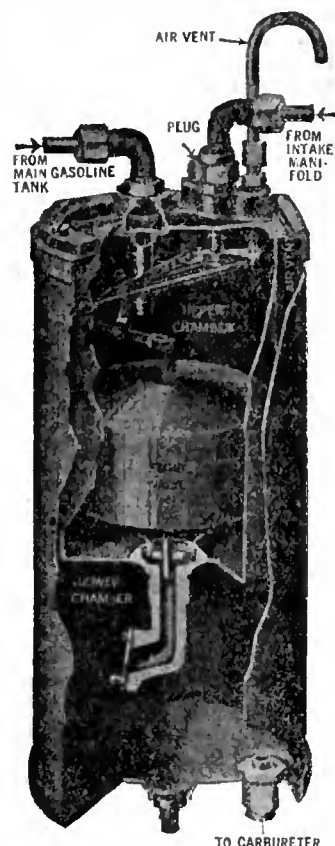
Cut-away view of Stewart vacuum tank (fuel feed system).
